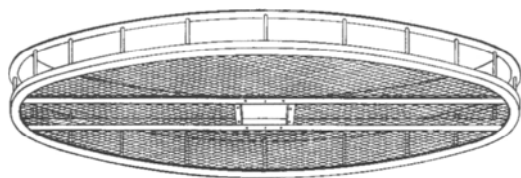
Fan blade guard mounted directly below blades. Note that drive shaft connects through the opening. (Used by permission: Bul. 107. SMITHCO Engineering, Inc.)
